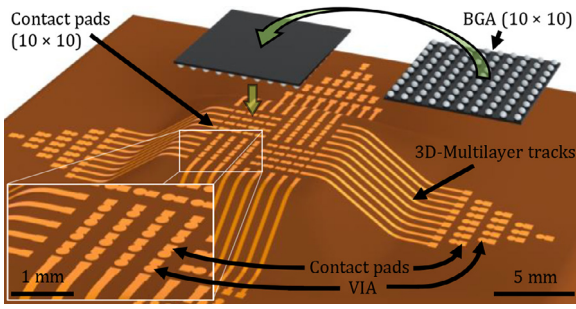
Printed multilayer 10 × 10 contact pad array render.
